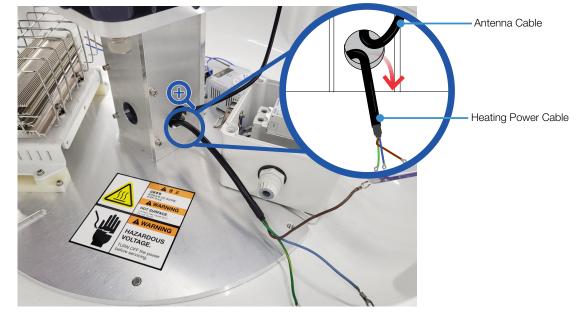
Inserting Cable through Cable Gland and Connecting Cable
